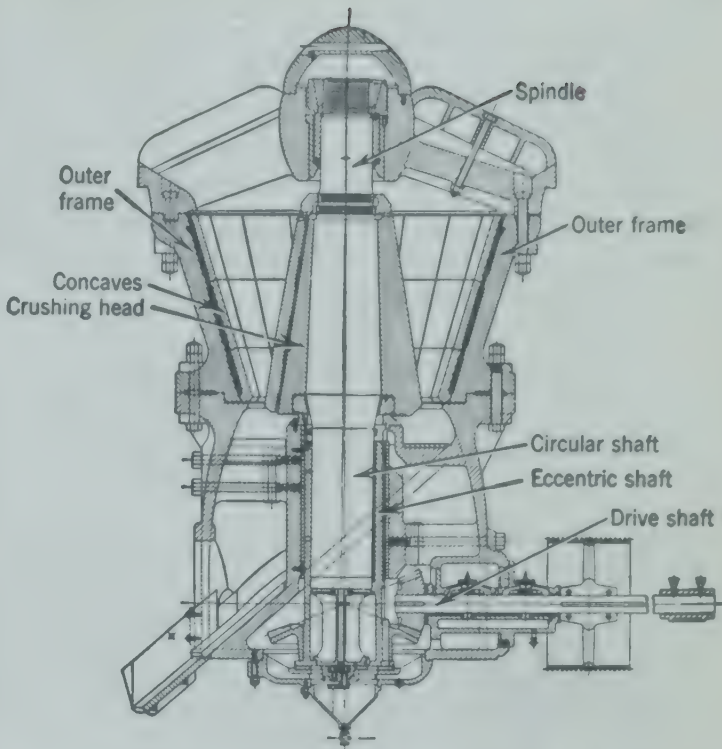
Sectional drawing of gyratory crusher of suspended-spindle type. (Allis-Chalmers Mfg. Co.)
